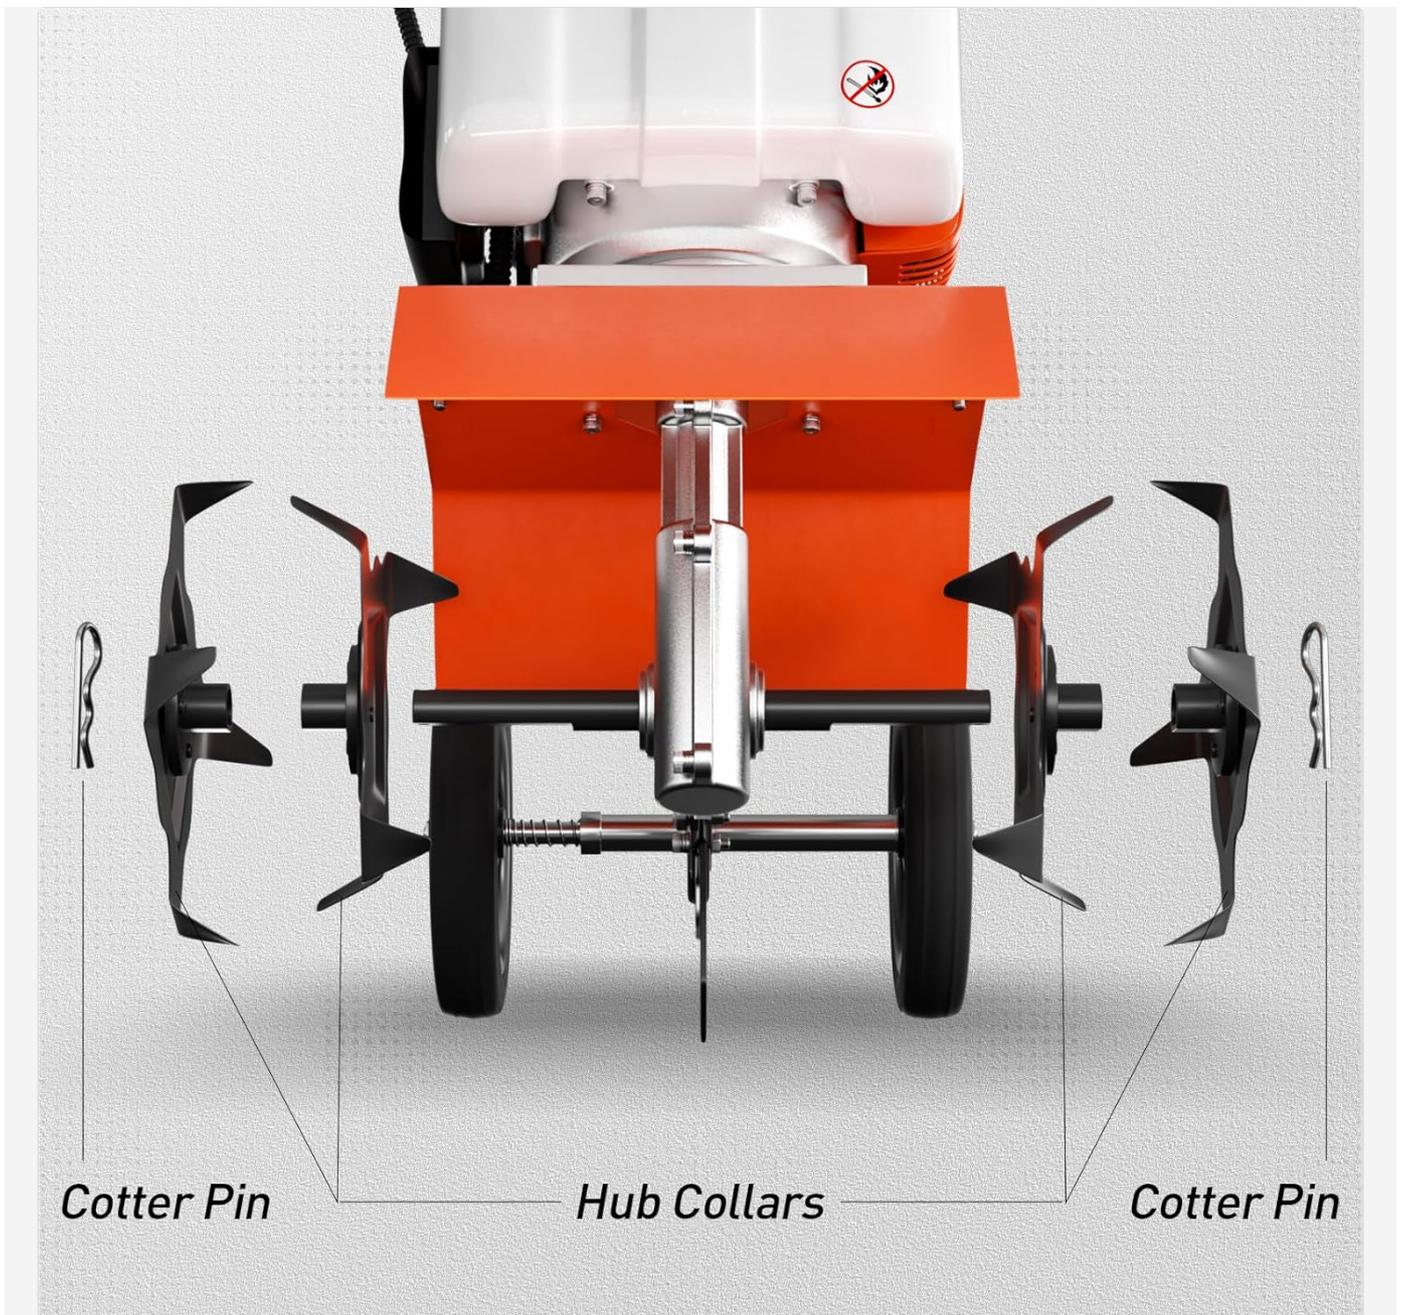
Detailed view of the steel tines, hub collars, and cotter pins for assembly.
